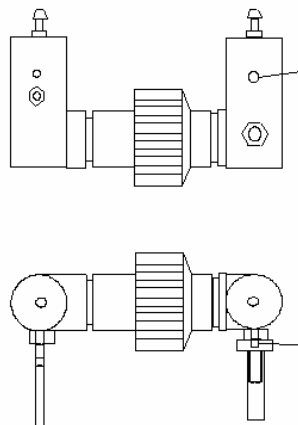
Drawing of plumbing coupler used for testing separator
